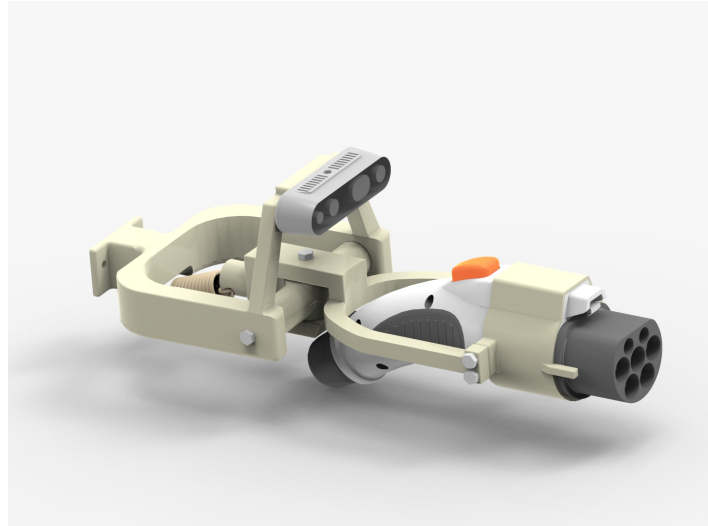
Handle with spring mechanism. Made in Solid Edge.
